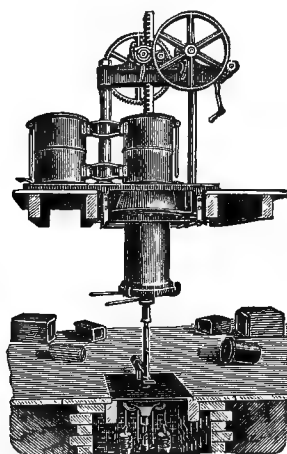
Boulet & Co.'s "revolver" forcing machine.
